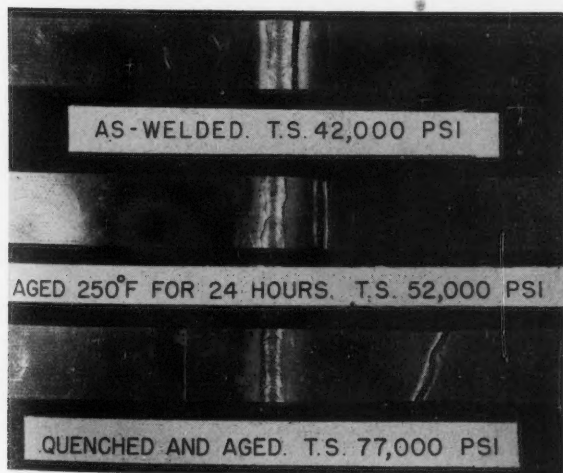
Typical failures of welded 75S-T6 clad upon mechanical testing.
